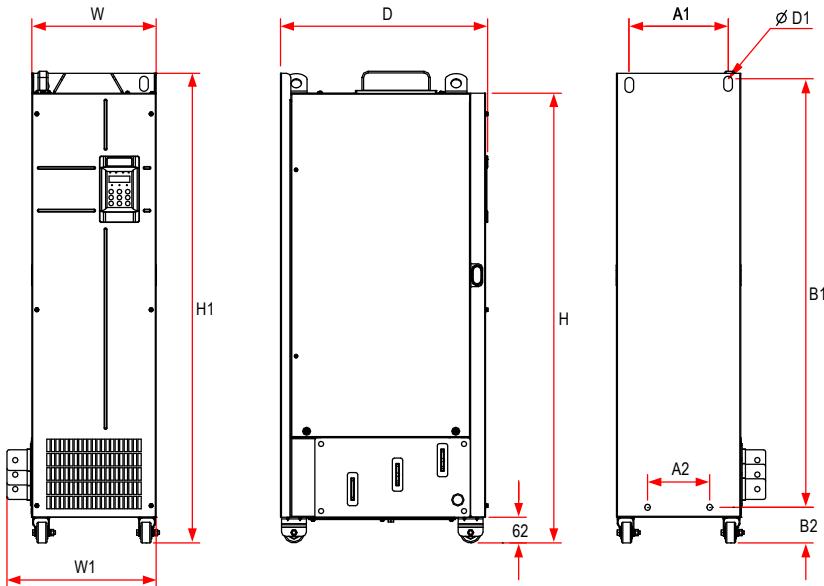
Outline dimensions and installation dimensions of 200–400 kW AC drive models (without the reactor base)
